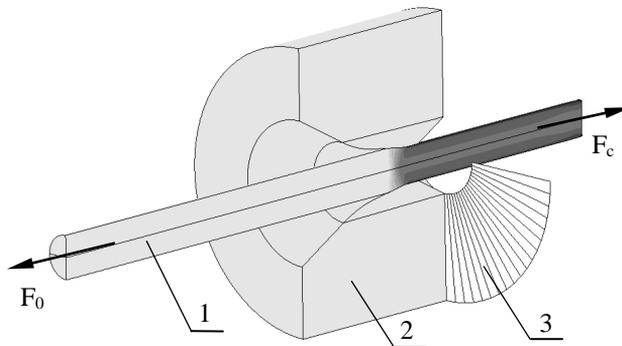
Scheme of drawing process modelled: 1 – drawn wire, 2 – drawing die, 3 – abutment surface, F_c – drawing force, F_0 – backpull force
